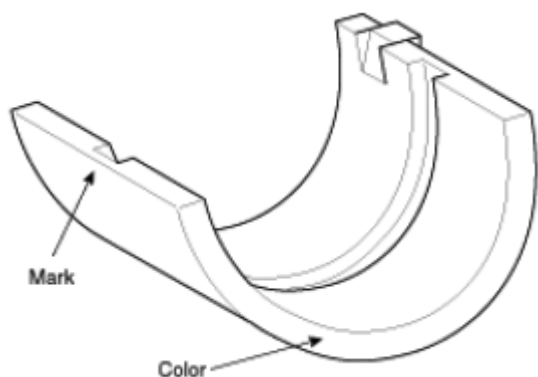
Identifying Identification Mark (Crankshaft Bearing)
